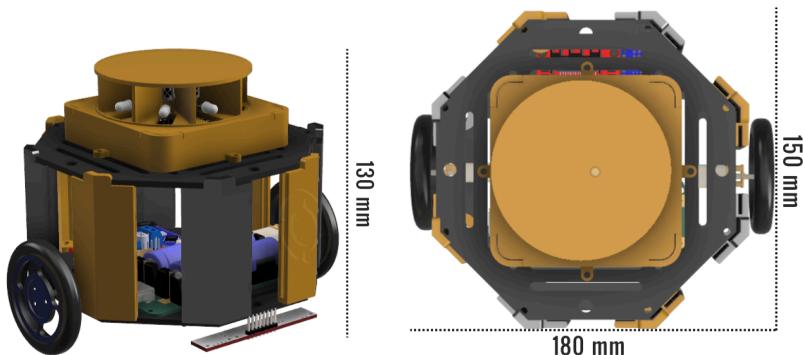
Pictures of the robot chassis with important dimensions are shown for (a) side front, (b) top .
